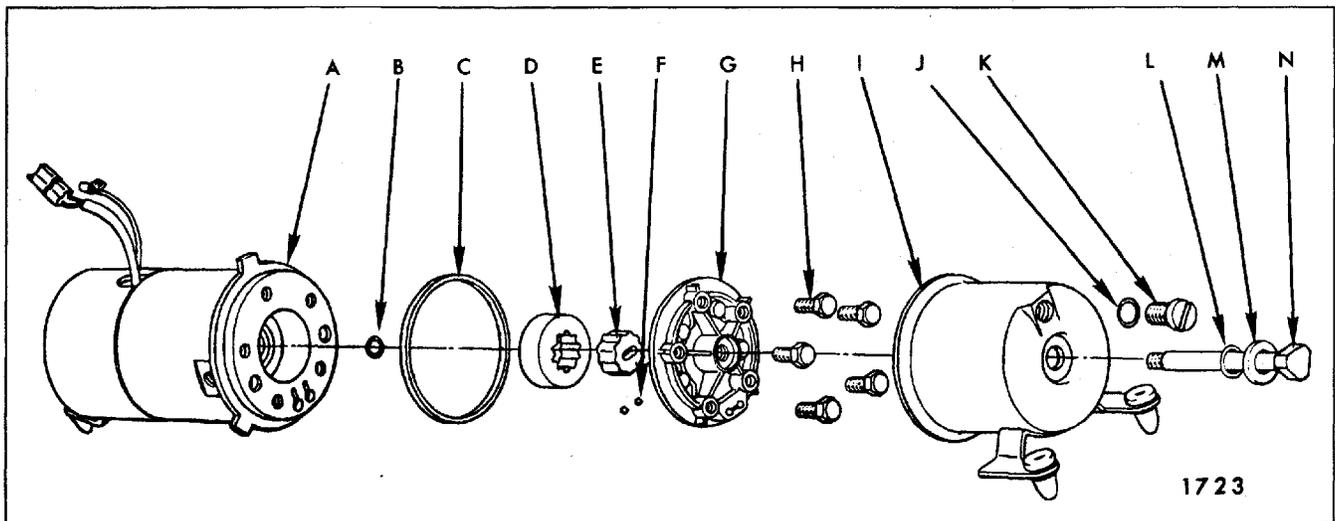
Hydro-Lectric Motor And Pump Disassembled
